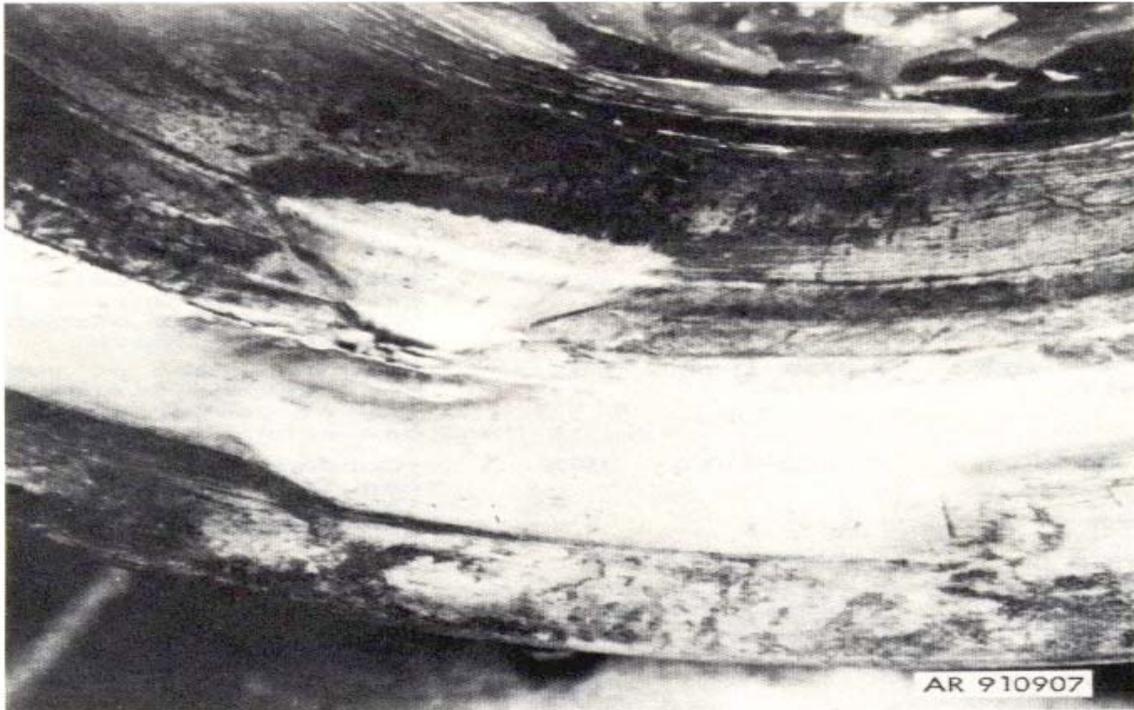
Groove cut by gas wash across gas check seat: CONDEMN.
